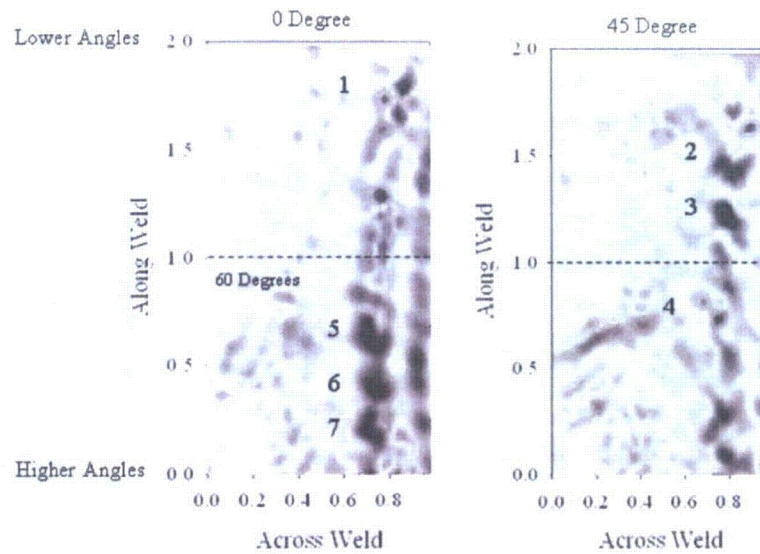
0- and 45-Degree Scans Centered on 60 Degrees on the J-Groove Weld of Nozzle 31
